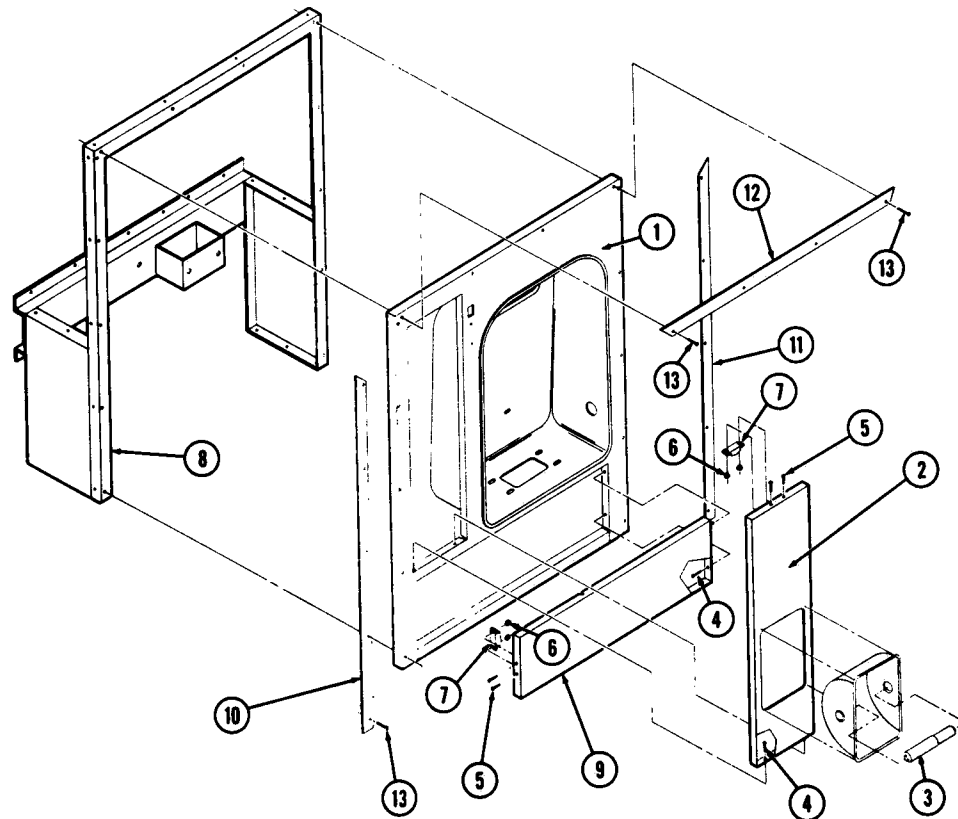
CABINET BODY ASSEMBLY: Model H230 (BA10).
